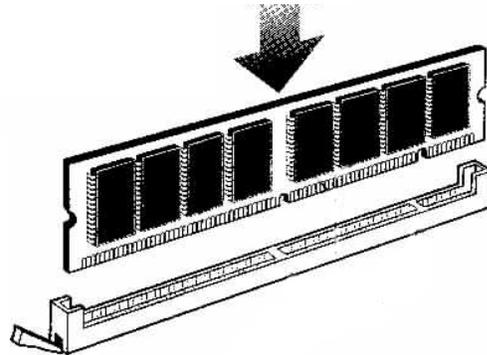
DIMM Installation The ejector pushed the module out of the socket. Modules are keyed for proper alignment.
